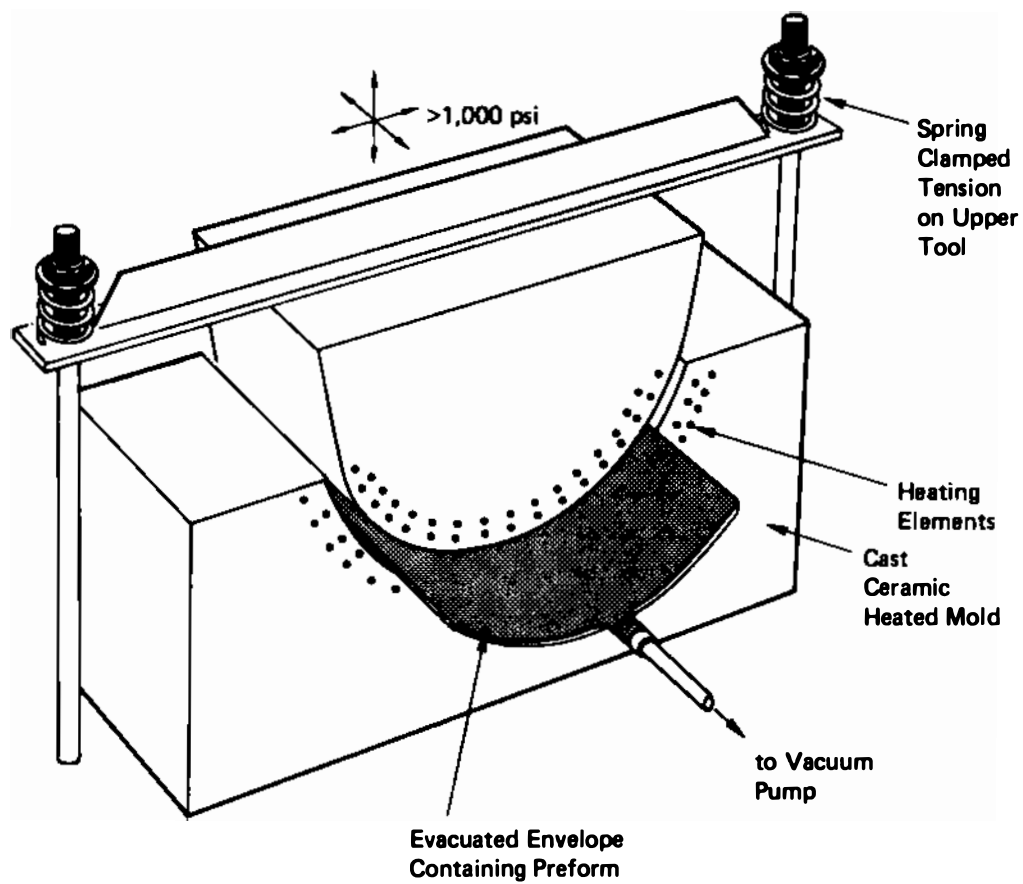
External heated tool hot molding (courtesy of AVCO Corporation).
